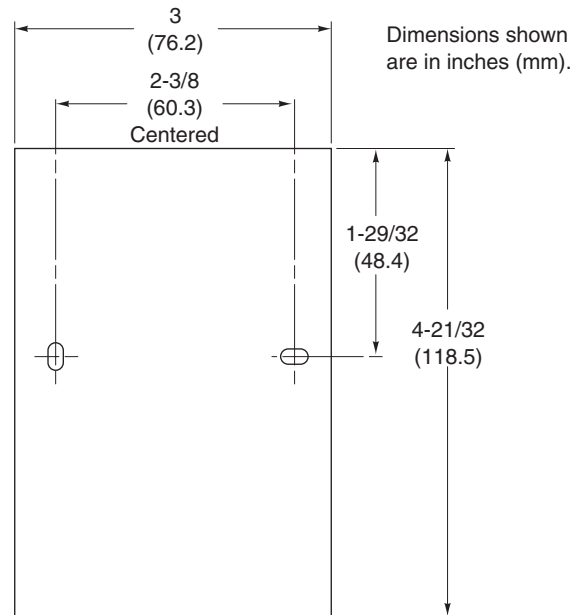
Mounting Dimensions for 1/4 DIN Electrical Box Mounting.
